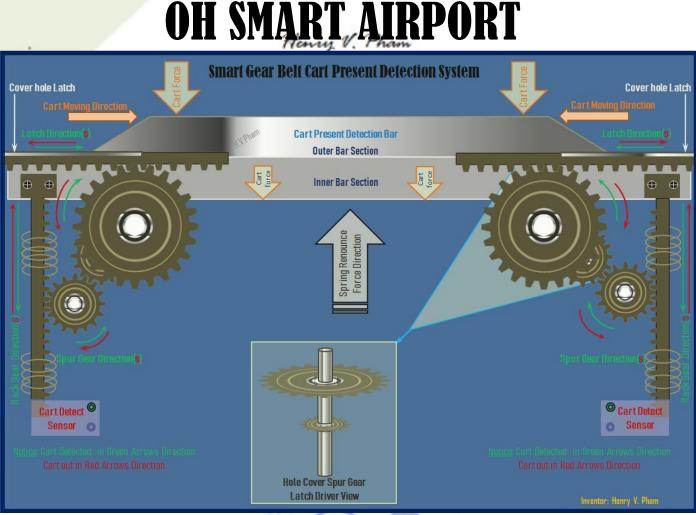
OH SMART AIRPORT - Smart Gear Belt Cart Detection/Protection Mechanism View
